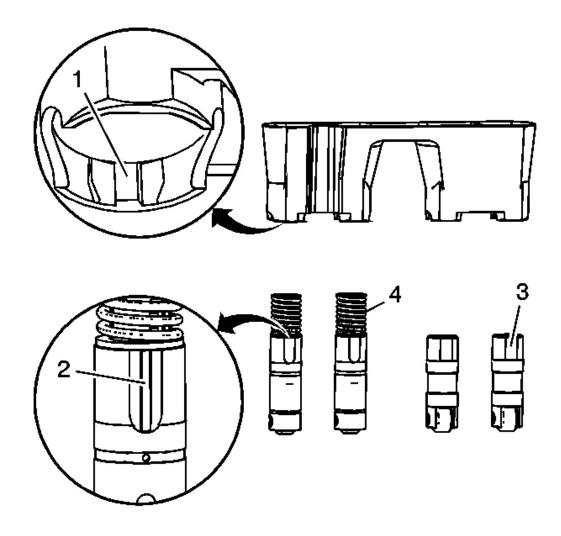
Inserting Valve Lifters Into Lifter Guides Courtesy of GENERAL MOTORS CORP.
